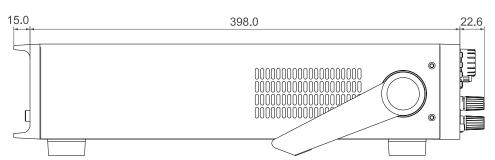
N3411 Series Master Chassis side Dimension(mm)
